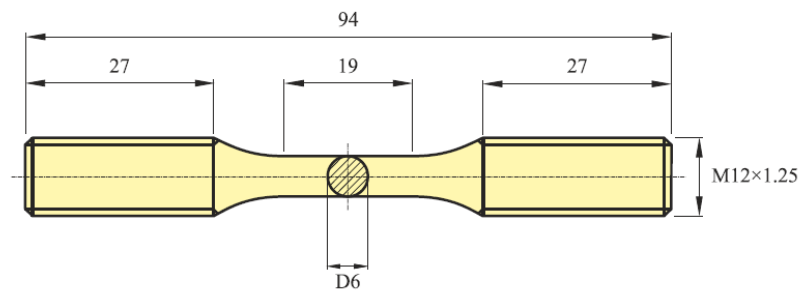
Specimen geometry of the low-cycle fatigue tests (dimensions in mm).
